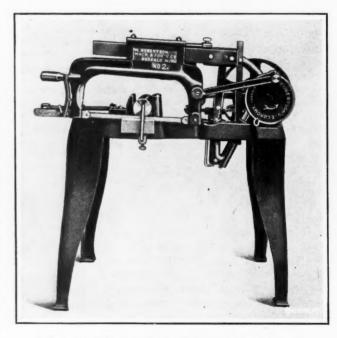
, No. 2 Improved Type "Economy" Saw, built by the W. Robertson Machine & Foundry Co.
